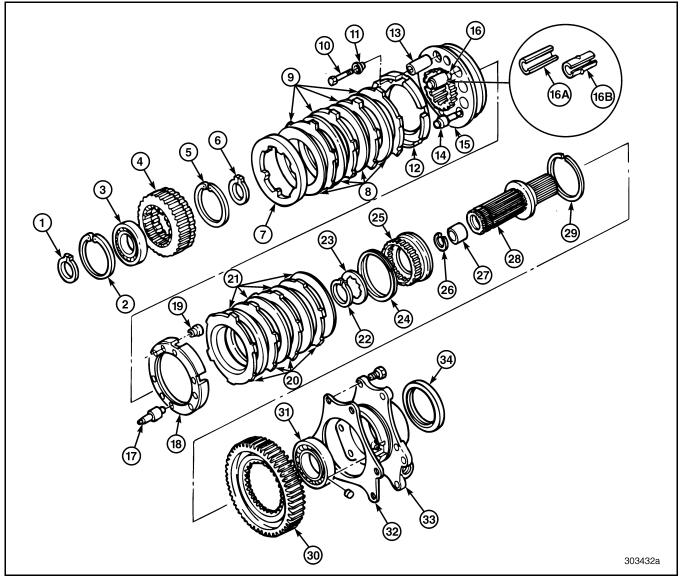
Exploded View of Rear Mainshaft and Synchronizer Assembly, T313–T318(L)(LR)
